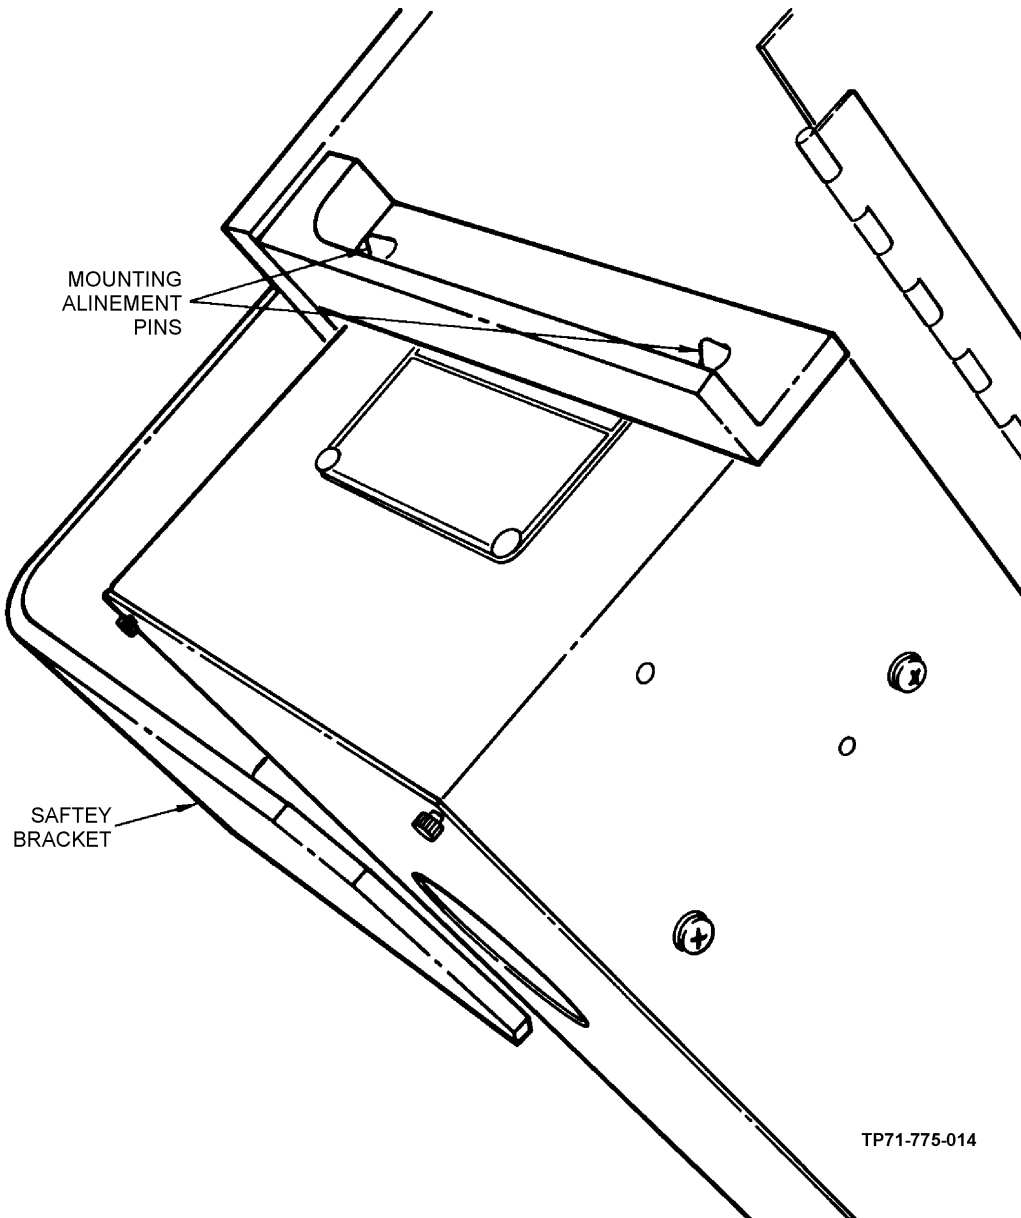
IVD Electronics Assembly Installation (Forward View)
